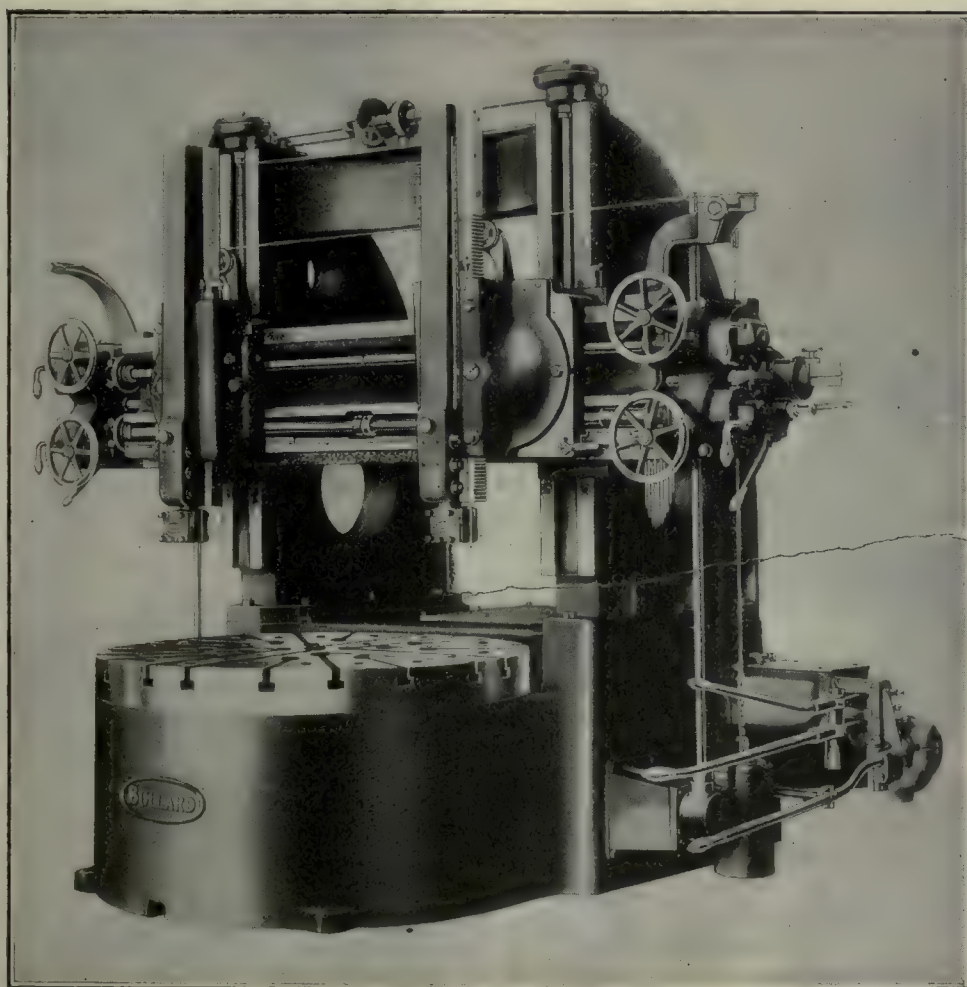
FRONT VIEW OF THE BULLARD 61-IN. "MAXI-MILL"
